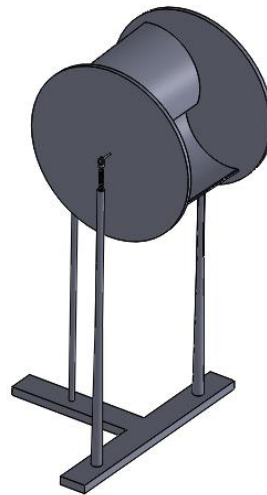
Final assembly of the Savonius rotor and the test bench done with CAD software
